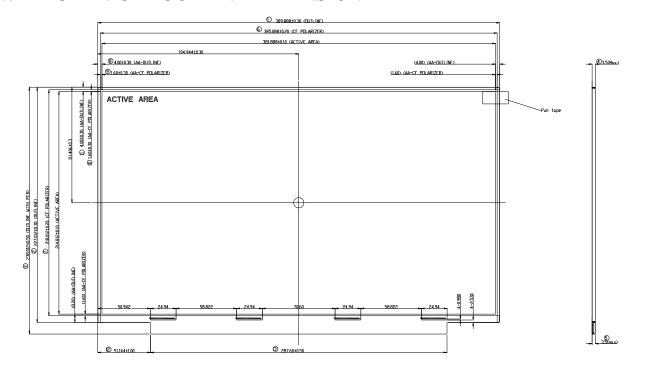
TFT-LCD Module Outline Dimension (Front View)
